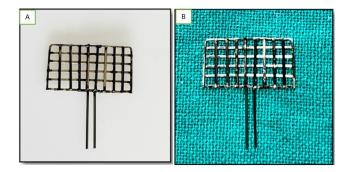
A: 0.016" x 0.022 wires welding horizontally; B: 0.016" x 0.022 wires welding horizontally.
